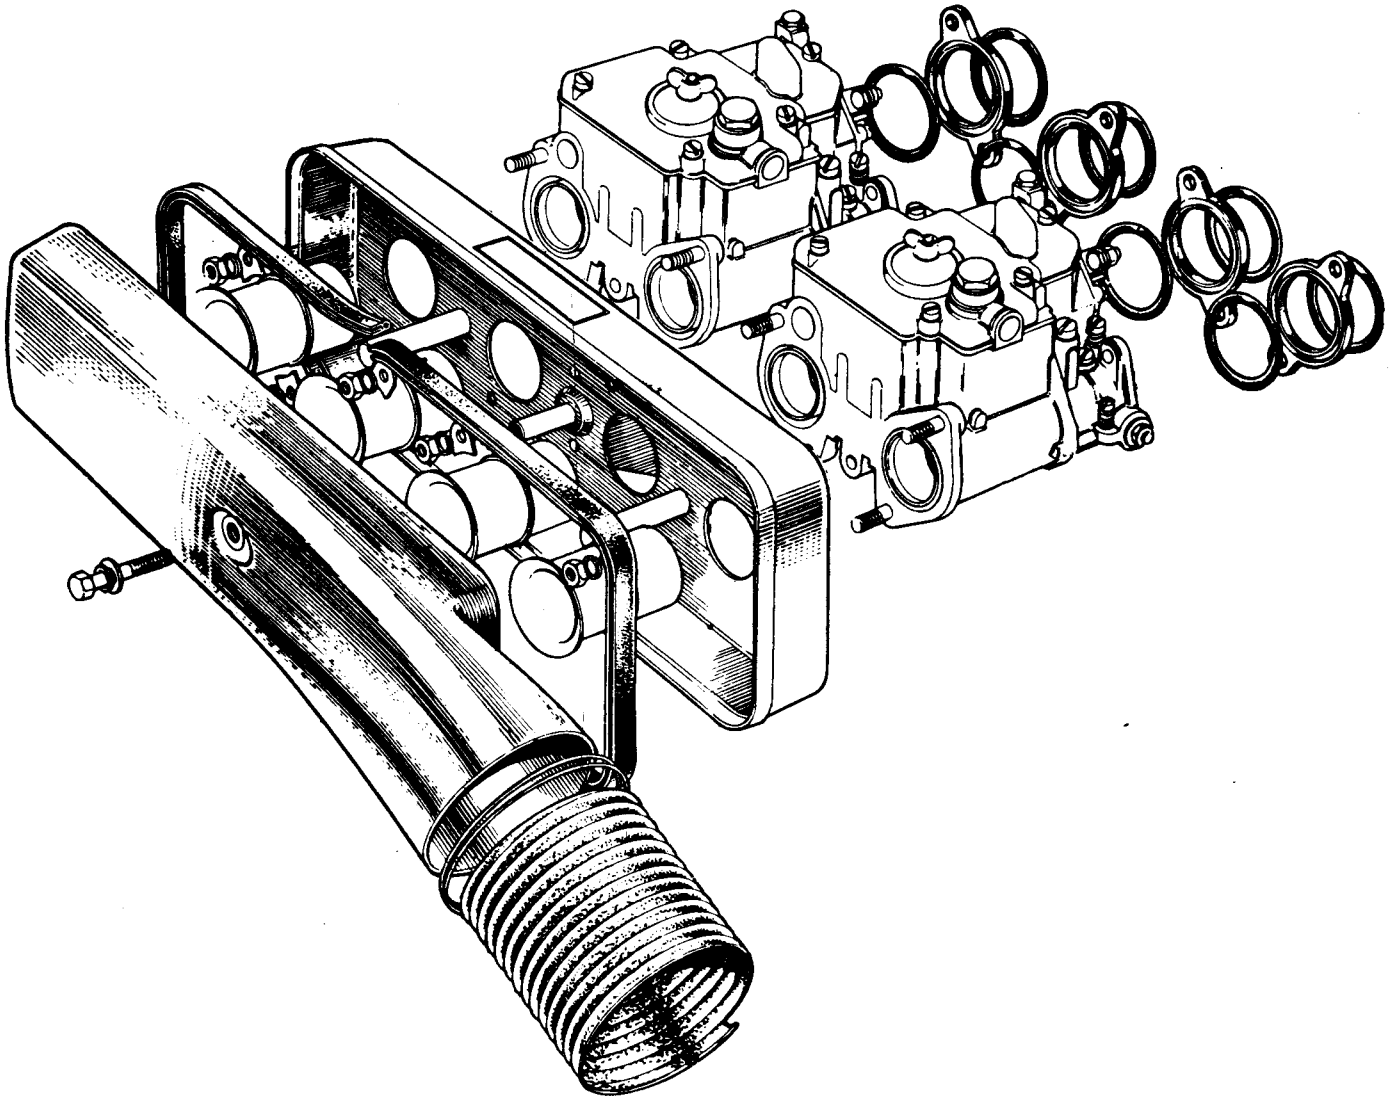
AIR BOX & CARBURETTER ASSEMBLY
